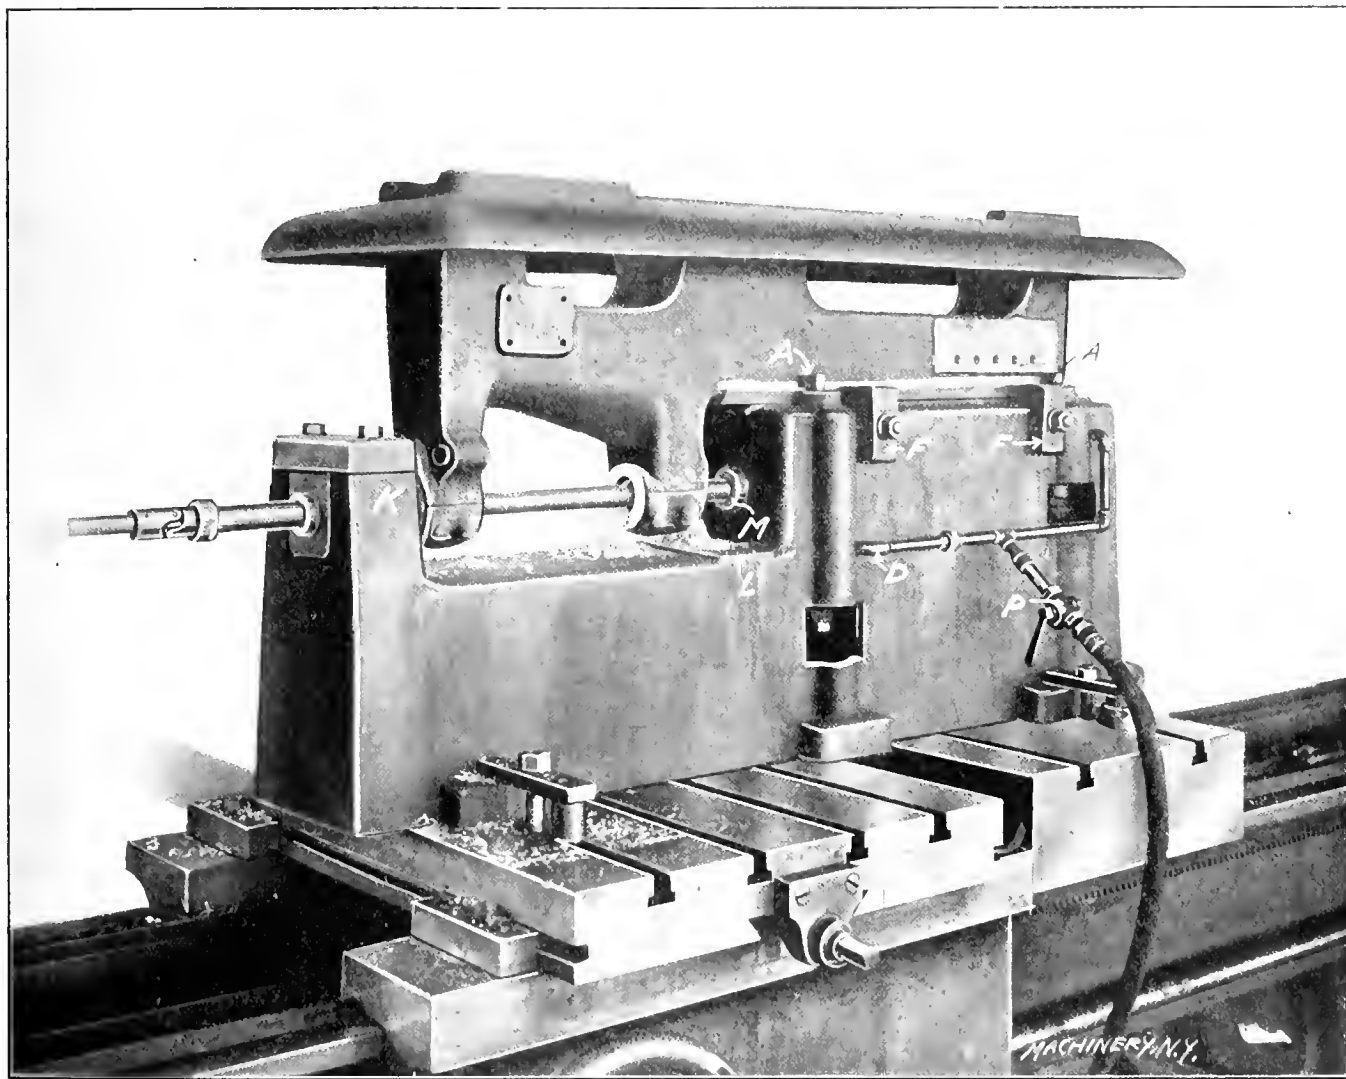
Boring Fixture for Turret Lathes, with Pneumatic Clamping Arrangement.
